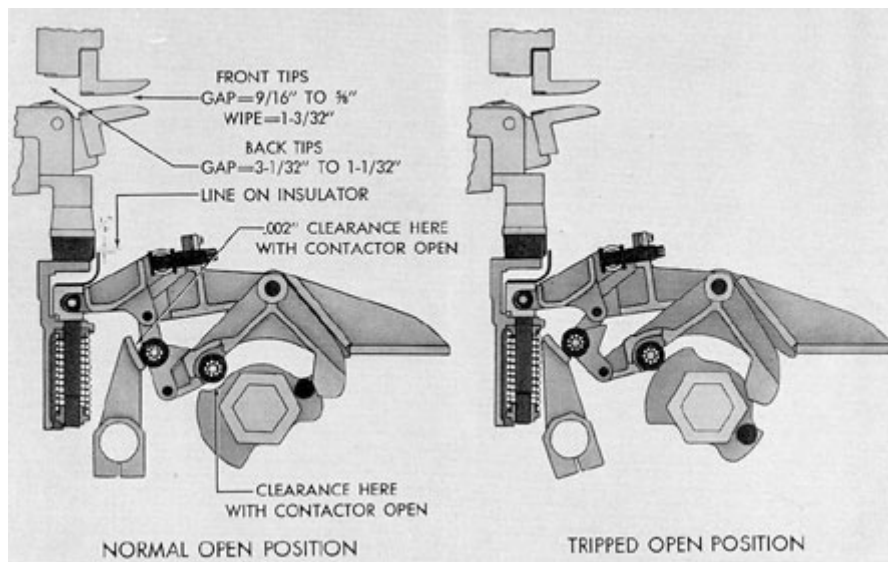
Operating mechanism of G.E. motor, generator, and battery contactors, OPEN position.
